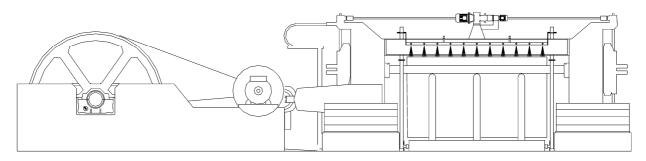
Marble gang saw with open structure and mobile blade carriage
